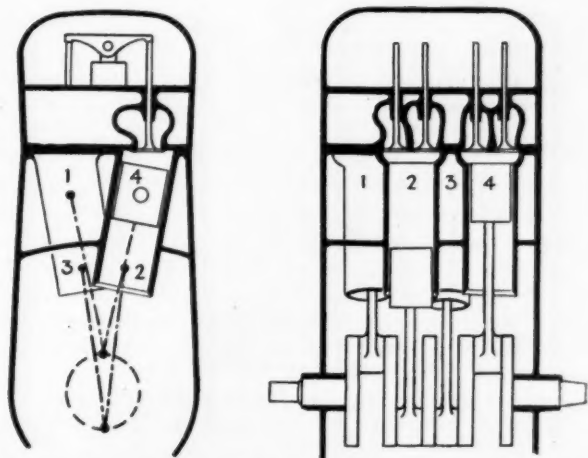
Diagram of four-cylinder V engine with four throw single plane crankshaft
